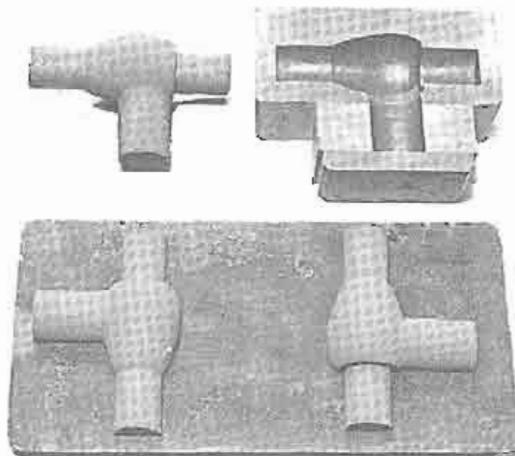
(Upper right) A dump-type core box; (bottom) two core halves ready for baking; and (upper left) a completed core made by gluing two opposing halves together.
